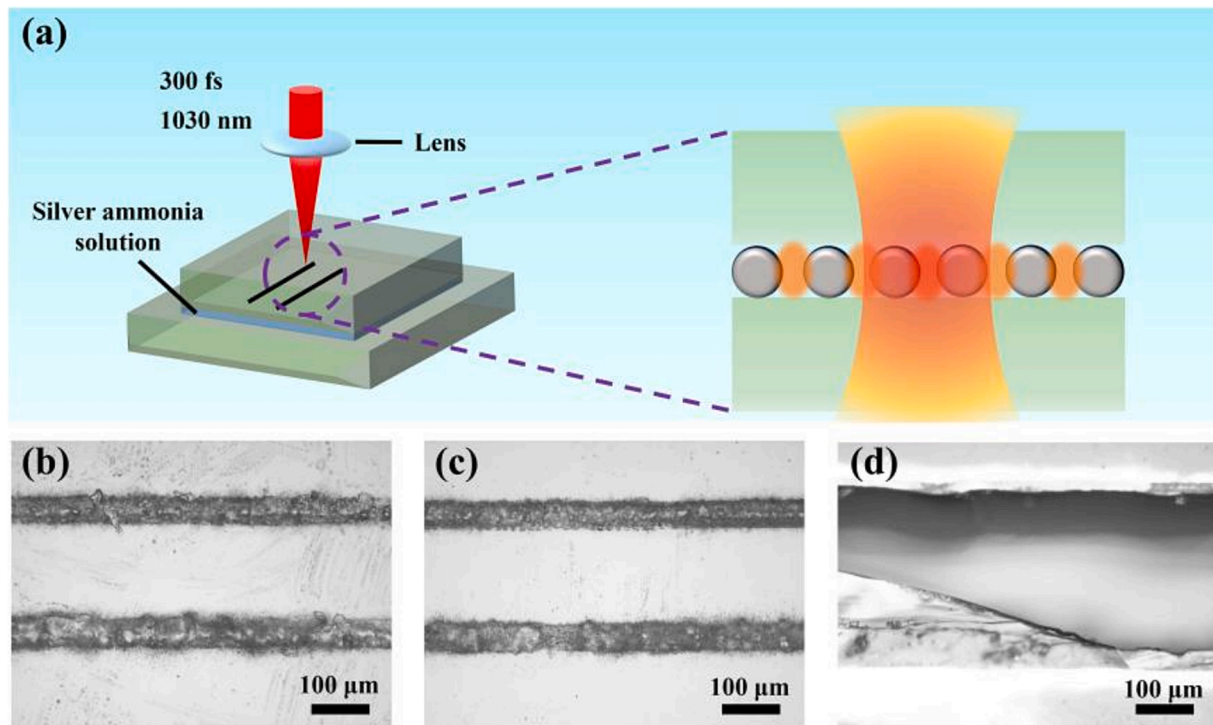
(a) Schematic of the silver ion solution layer-assisted femtosecond laser micro-welding process; optical images of seams in (b) naturally stacked glasses; (c) a water intermediate layer; and (d) silver ion solution layer-assisted fs laser welding.
